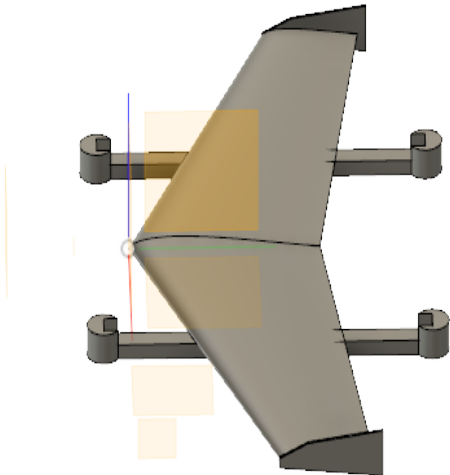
3D Structure of side view designed using Auto Fusion 360
